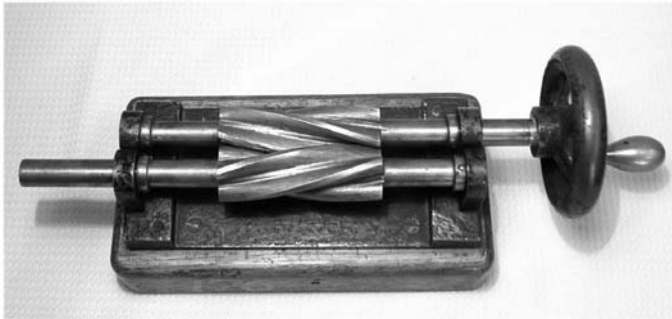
The helical gearing with $z_1 = z_2 = 4$
